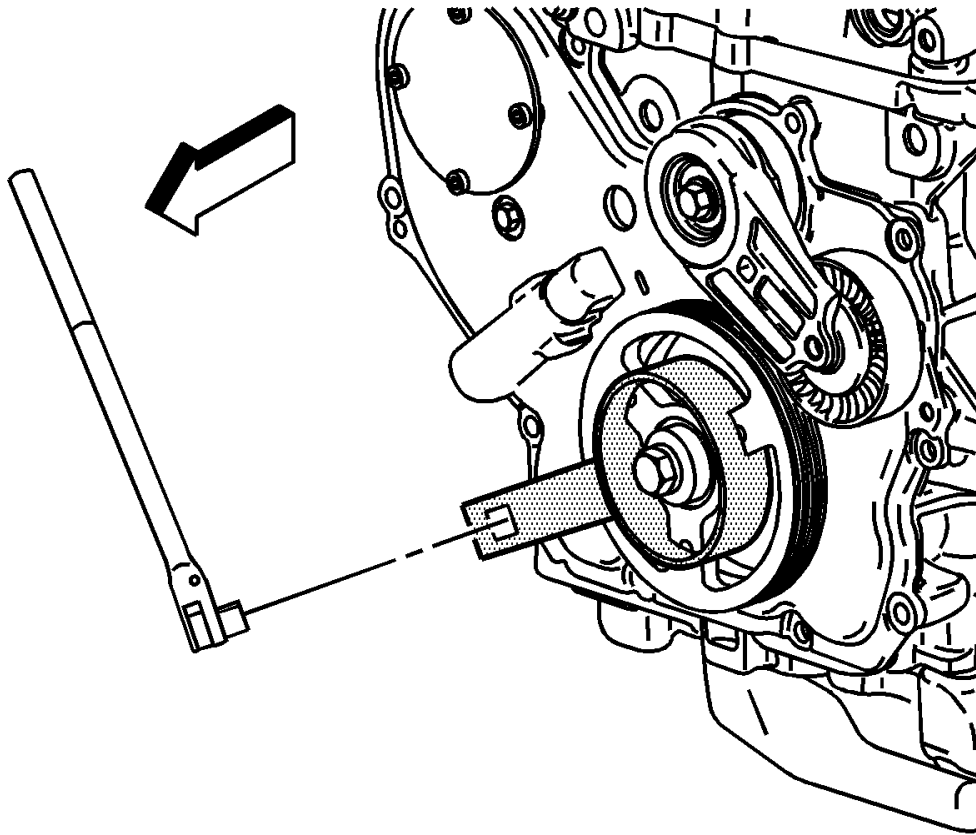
View Of Harmonic Balancer Holder J38122-A
